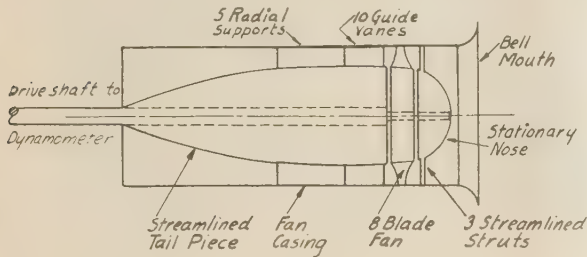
FAN ASSEMBLY WITH STATIONARY NOSE AND TAIL PIECE IN ITS CASING
